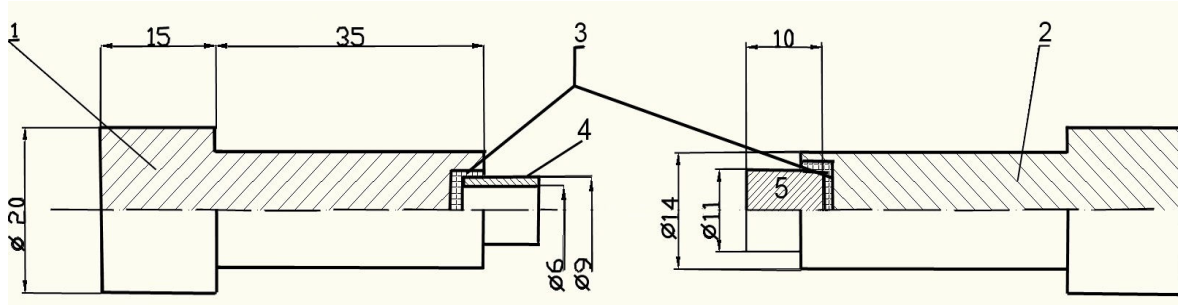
Diagrammatic representation of specimens: 1, 2 – holders, 3 – solder, 4 – movable specimen, 5 – fixed specimen
